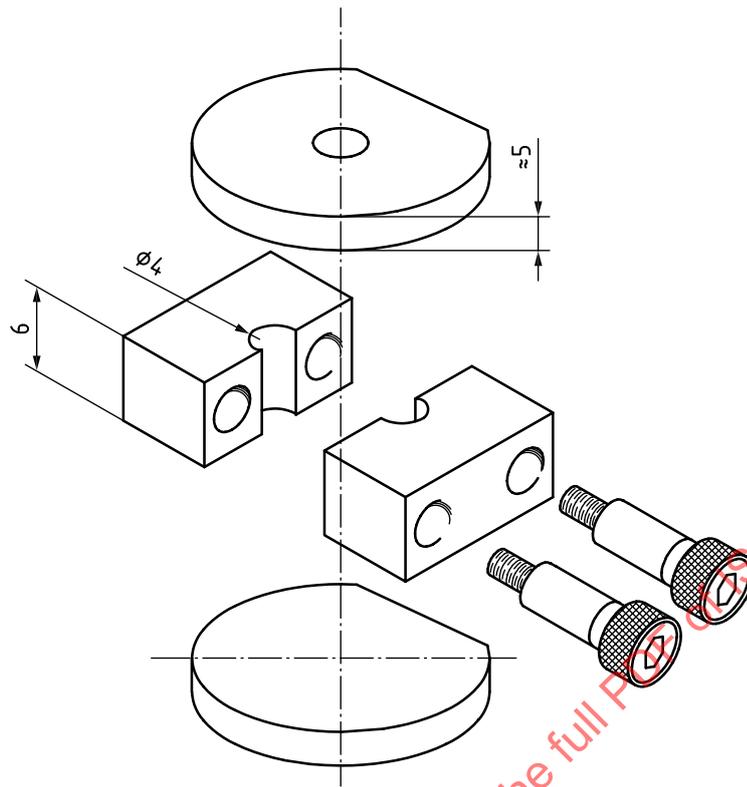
Mould and plates for preparation of compressive strength test specimens
